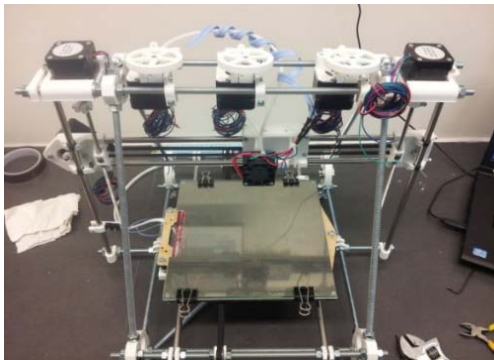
Replicating Rapid Prototyper (RepRap) 3D printer
